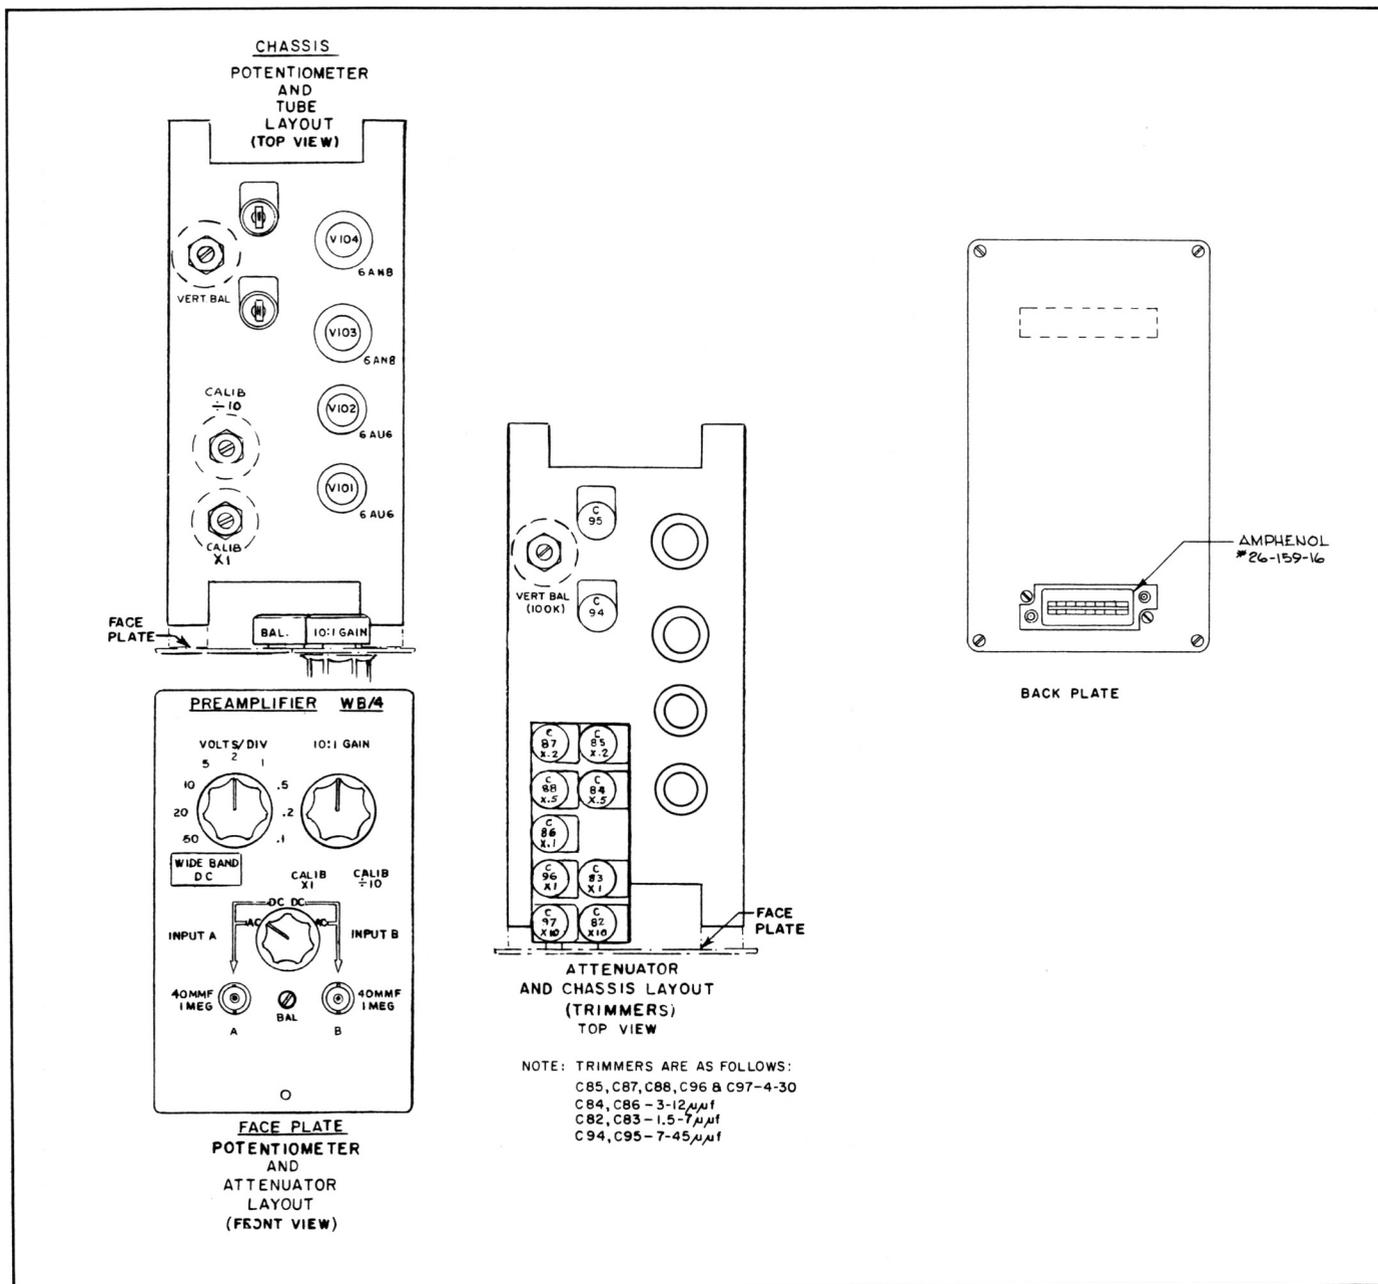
Tube, Potentiometer, and Trimmer Layout, WB/4 Preamplifier
